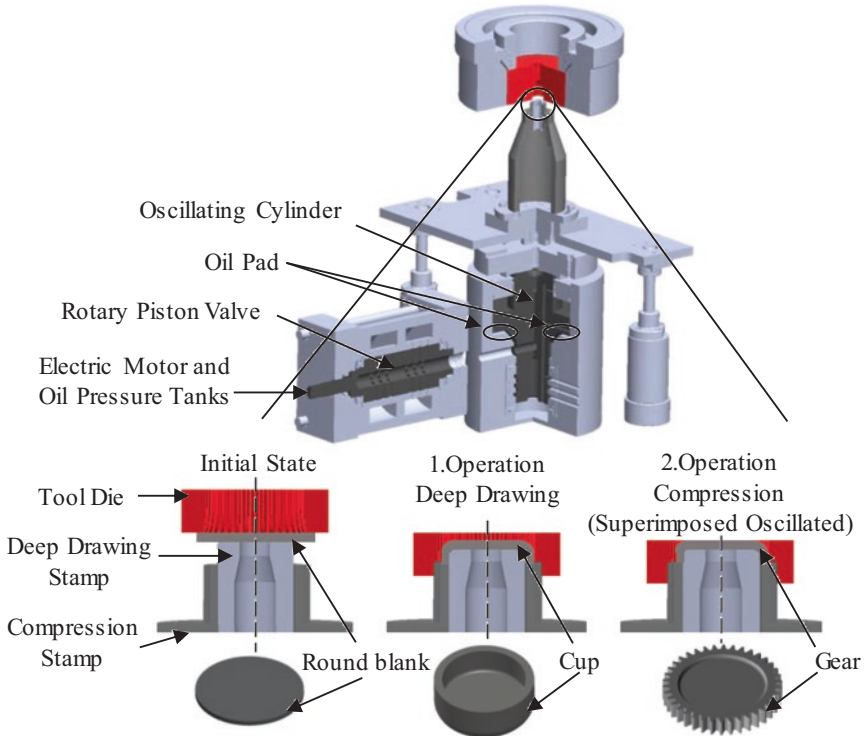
Enhanced tool system for superimposed oscillated compression experiments.
